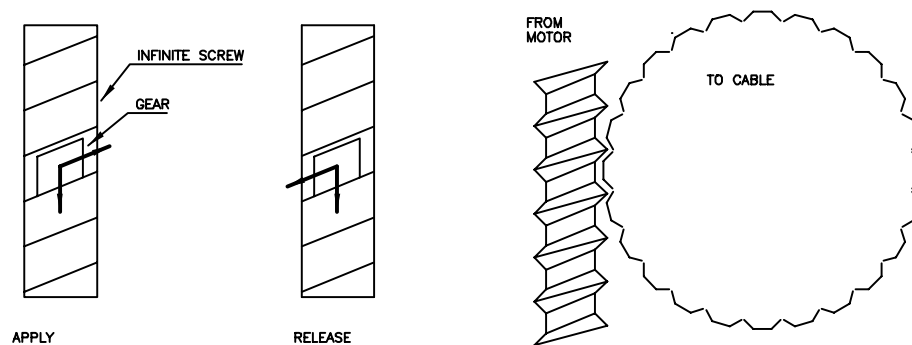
Brake Motor Gear Box -- Force Diagram and Schematic
